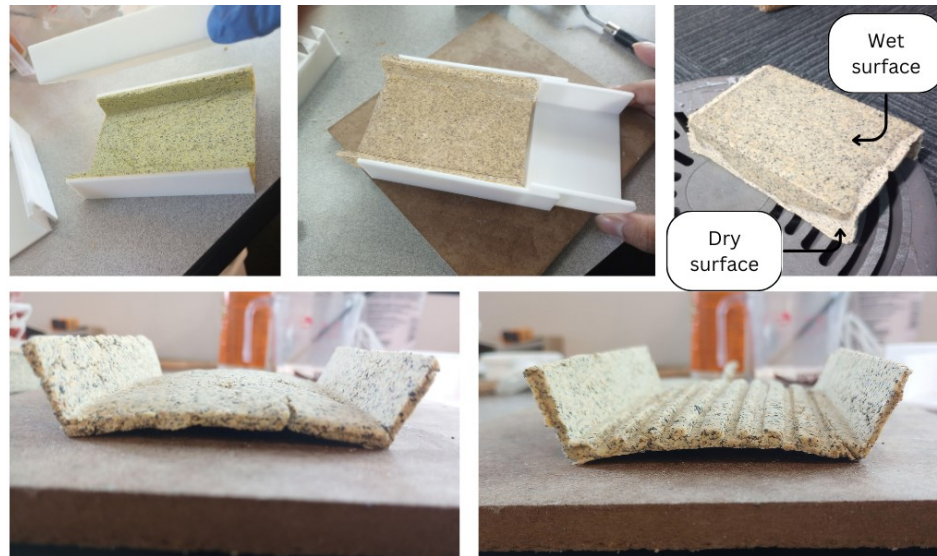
Press molding and air drying the corn shape (top); Bending due to shrinkage with and without scorching pattern (bottom).
